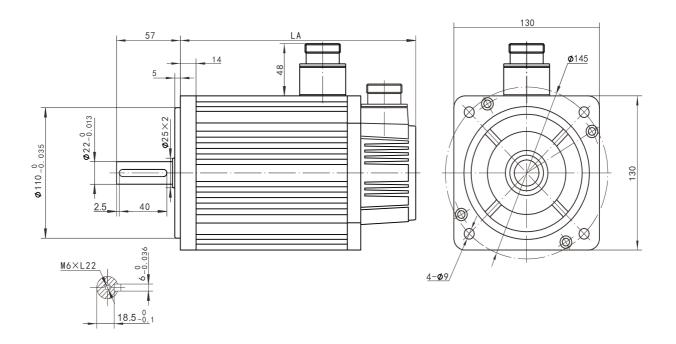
Installation dimension of WE series 130 flange servo motor
